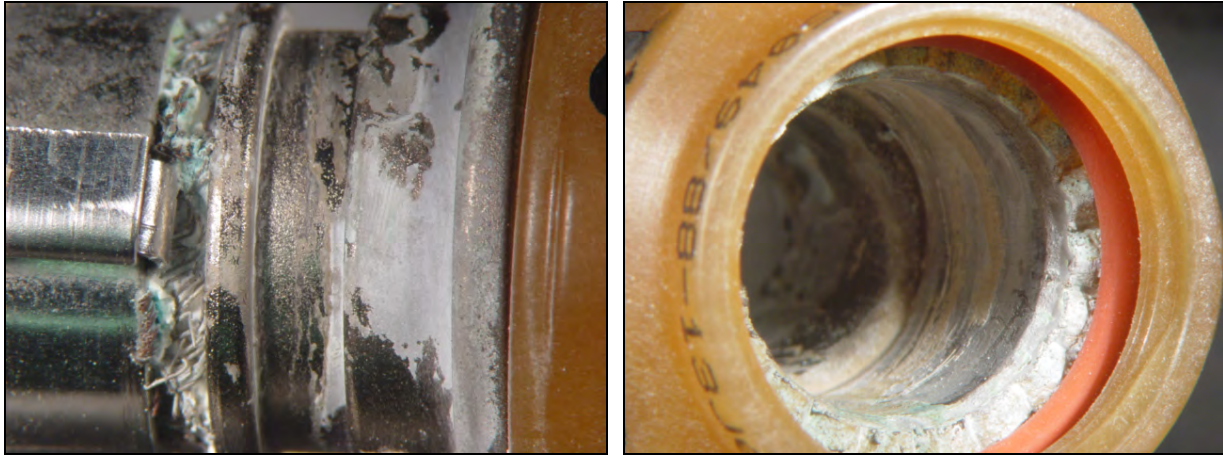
1-1, B1g1-2, B1g1-3. The SSG samples of the M85049 class W connector accessory assemblies also suffered extreme pitting during the salt spray test, although the damage was not quite as severe as on the control samples.
